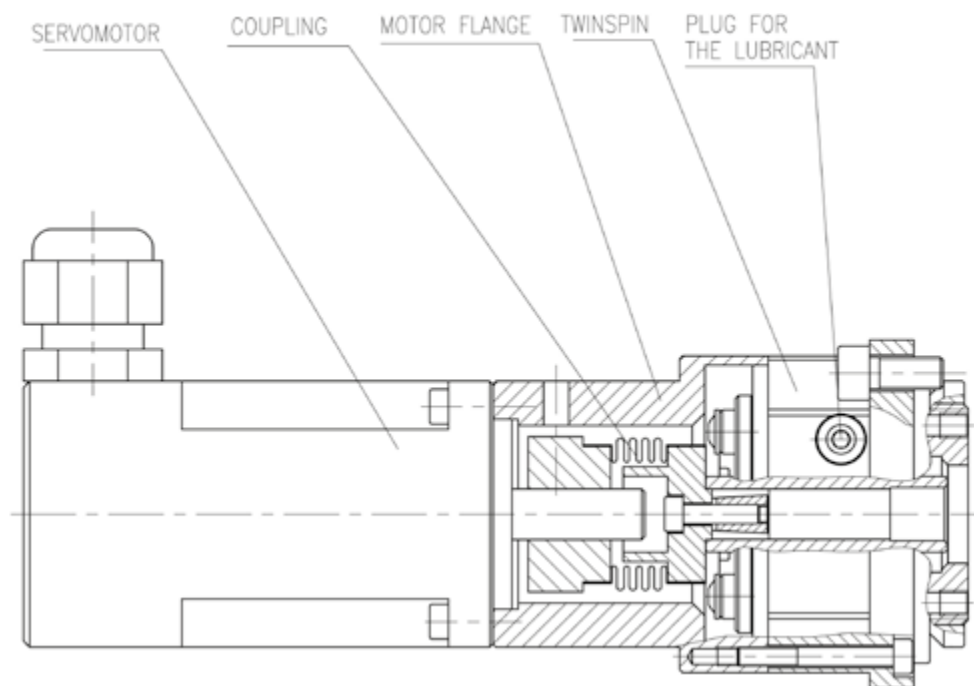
Typical connection of a motor to the M series reduction gear
